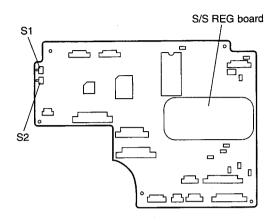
Switch layout diagram inside the S/S REG board
